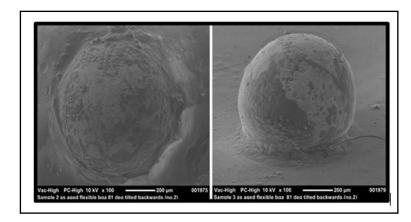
SEM images of the BGA solder joints test of the 66 hours of ATC.
